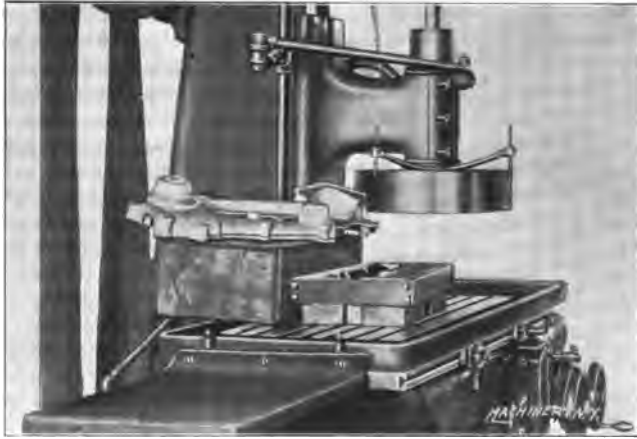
The Acme of Simplicity in Fixture Making. Face Grinding the Steering Gear Casing
